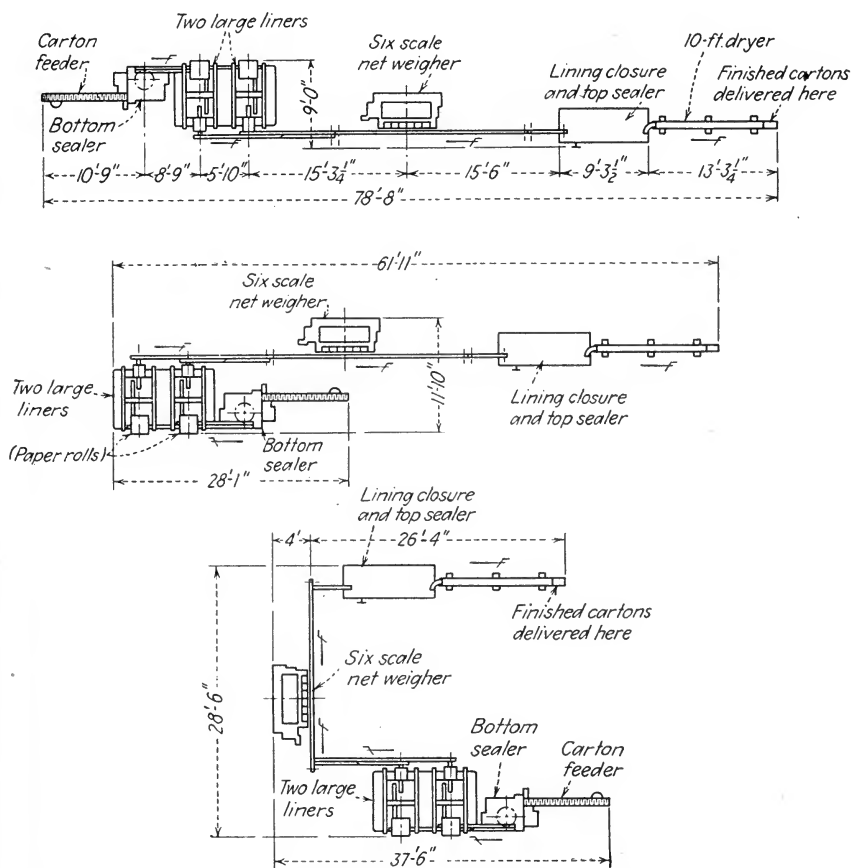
Here are three standard layouts for weighing and filling almost any dry, free-flowing material. All equipment is adjustable for different package sizes. Equipment manufacturers can in this way sell a standard packaging line and layout to fit almost any plant's conditions. Any other combination of this or other equipment may be obtained by an easy adjustment of the conveyor connections. (Courtesy of Pneumatic Scale Corporation.)
